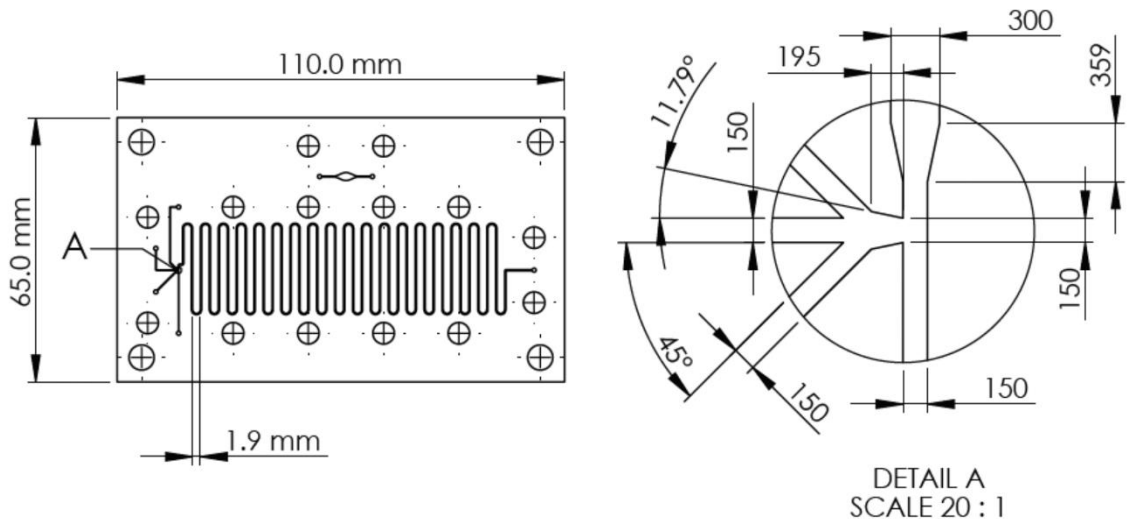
CAD drawing of the central channel insert made using SolidWorks. Detail A shows the “buffer channel” T-junction geometry. This drawing is mirrored from the one in Figure AI-1, as the central insert is flipped over during assembly. All dimensions are in microns unless noted otherwise.
